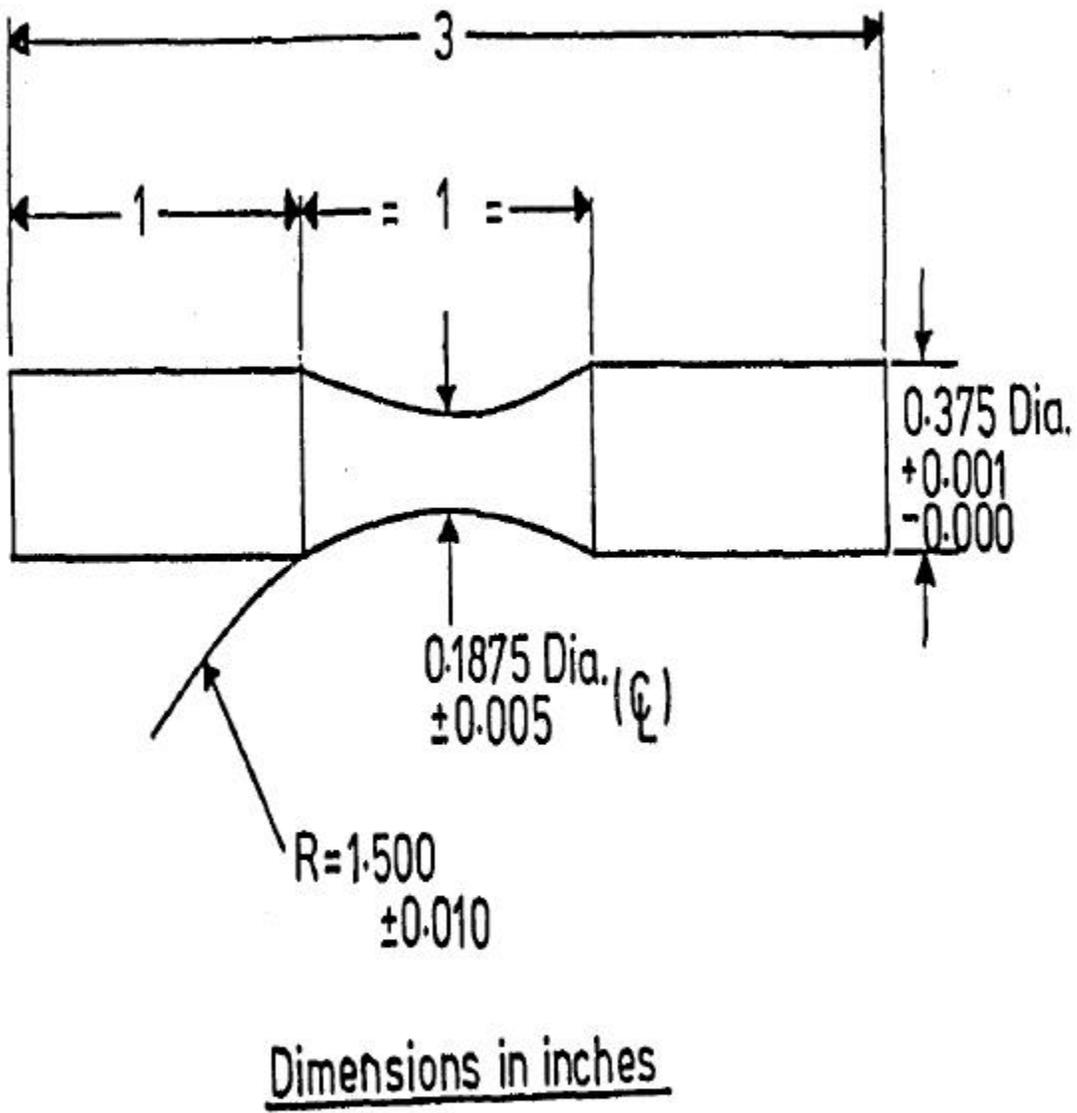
Rotating Bending Fatigue (RBF) Test Piece
